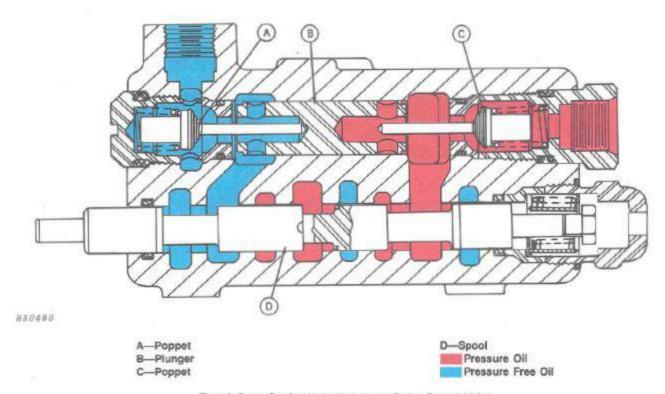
Cross Section Unloading Auger Swing Control Valve (Unloading Position)
